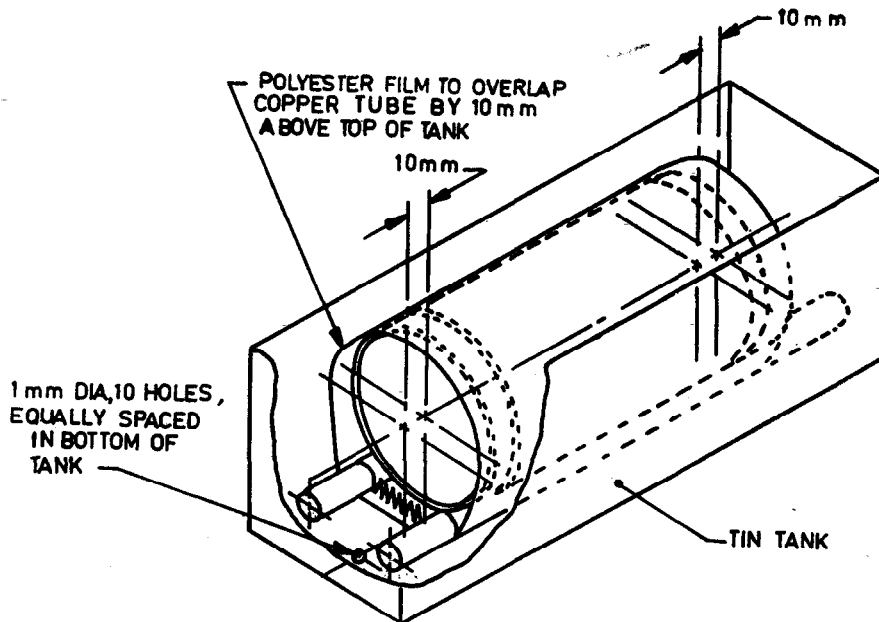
ASSEMBLY FOR SPECIMEN HOLDER
